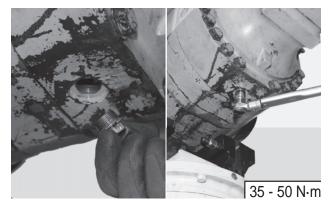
Install the oil drain plug. Torque wrench setting for screws: 35 - 50 N·m. Fill with oil.
